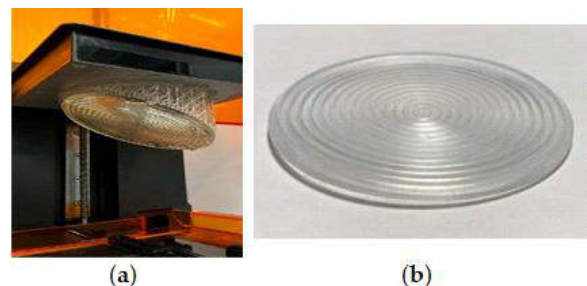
3D printing method for Fresnel lens manufacturing: (a) Inverted 3D printing of lens; (b) Finished 3D-printed lens
